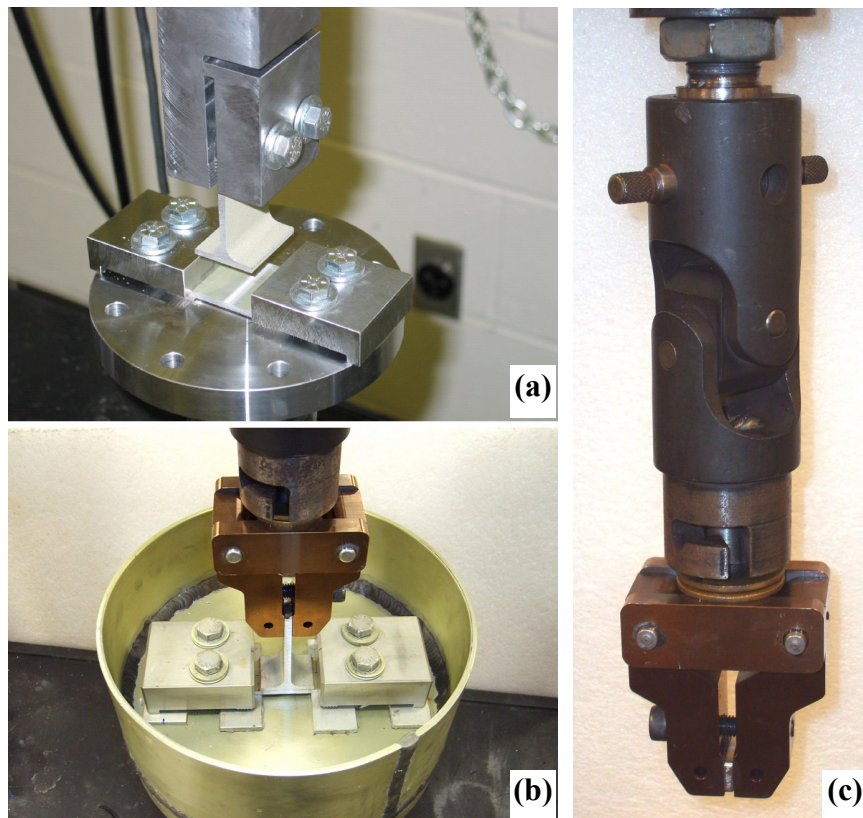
(a) Preliminary ambient fatigue tests were conducted with steel fixture with rigid upper clamp. (b) Subsequent ambient fatigue tests and corrosion fatigue tests were conducted with aluminum fixture with (c) steel upper clamp on universal joint.
